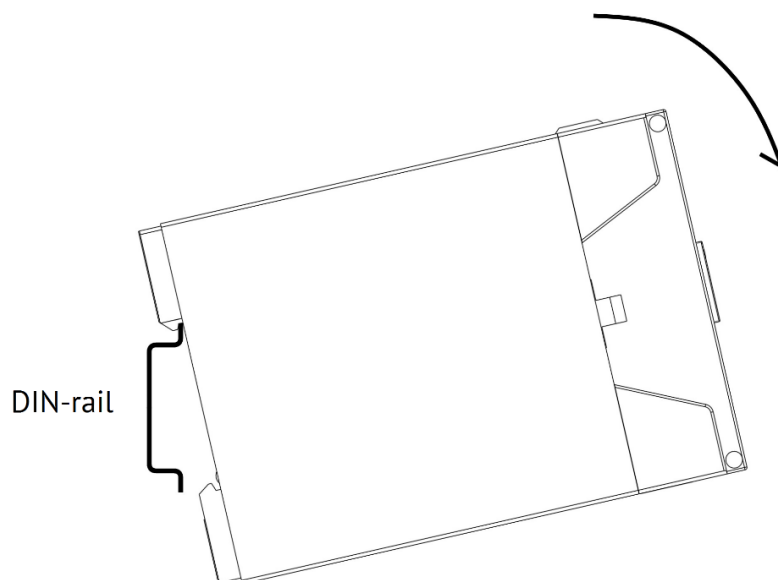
ENCS-2 installation to 35-mm DIN-rail
